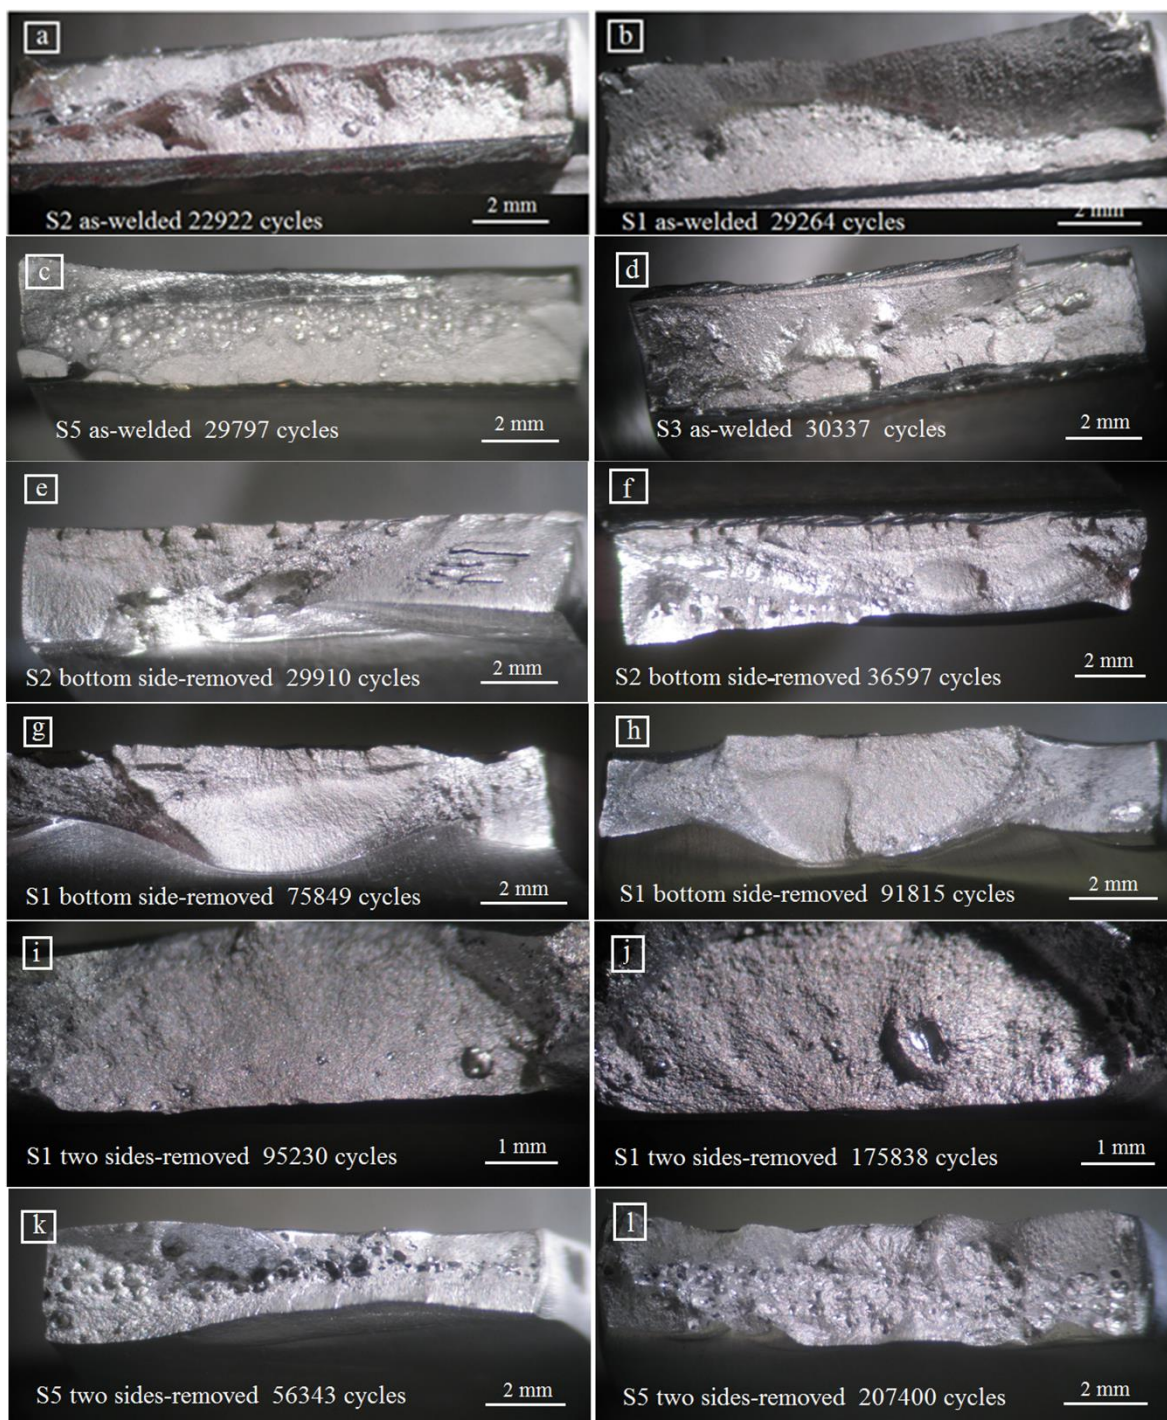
Fractured surfaces of specimens at 600 MPa.
